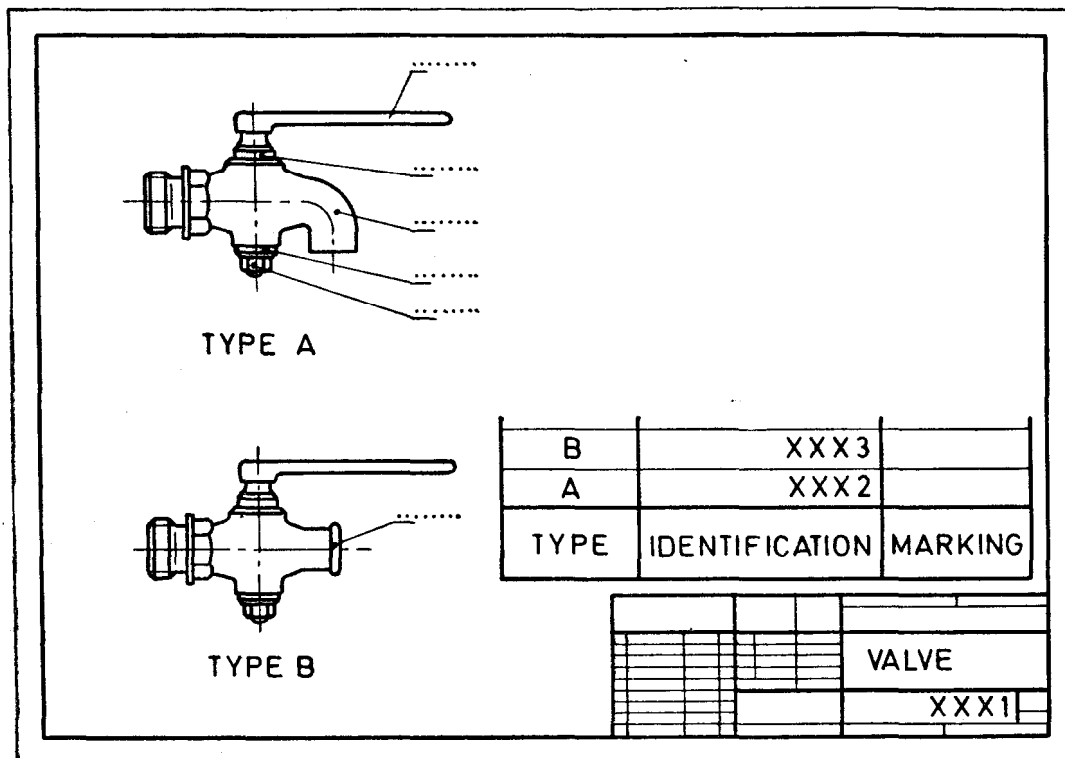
VARIANT DRAWING FOR SIMILAR ASSEMBLIES
